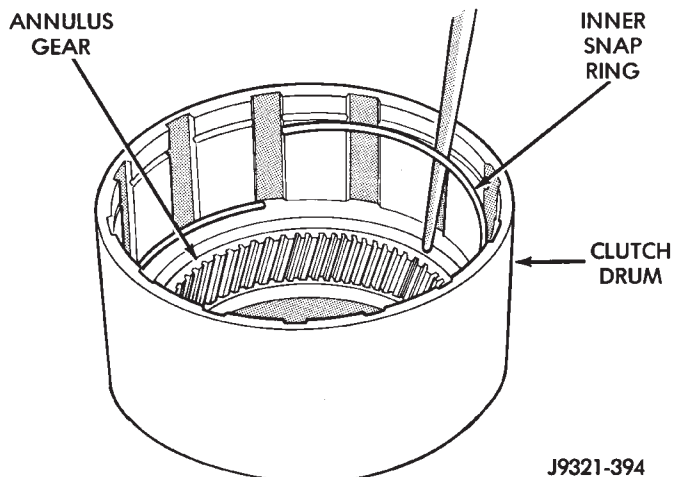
Clutch Drum And Outer Retaining Ring Installation
